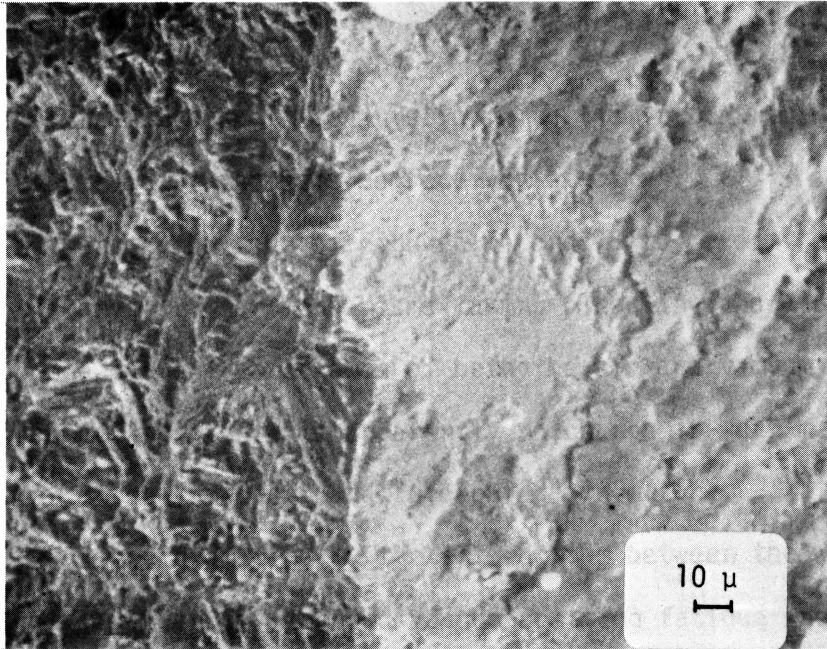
Intersection of wear and fracture surfaces of an as received specimen (2-15; 544,220 cycles) - fretting fatigue in air.
